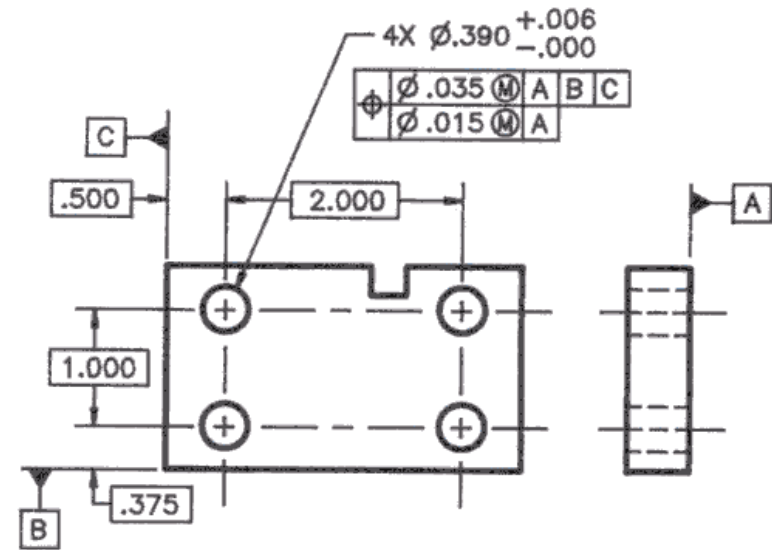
The feature relating tolerances can move within the pattern locating tolerance.
